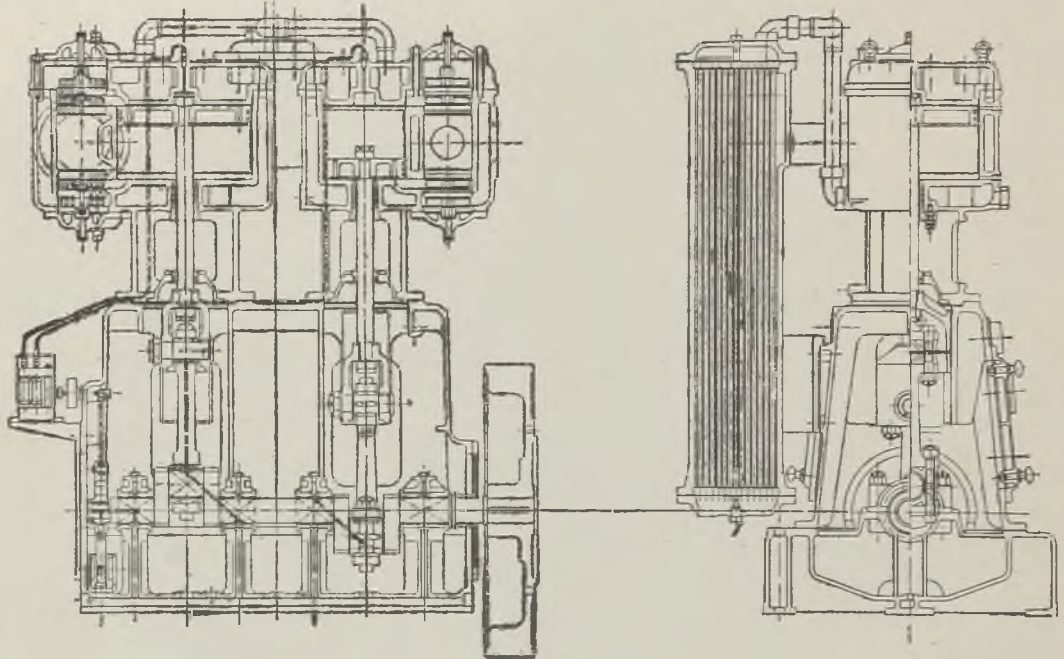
COMPRESSOR BEDPLATE CARRYING OIL AND CAST-IN BEARINGS.
